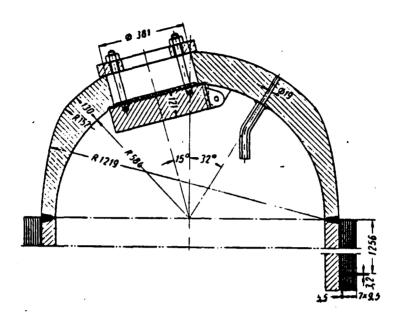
Nose section of the multilayer welded bottle with the thick-walled internal shell.
